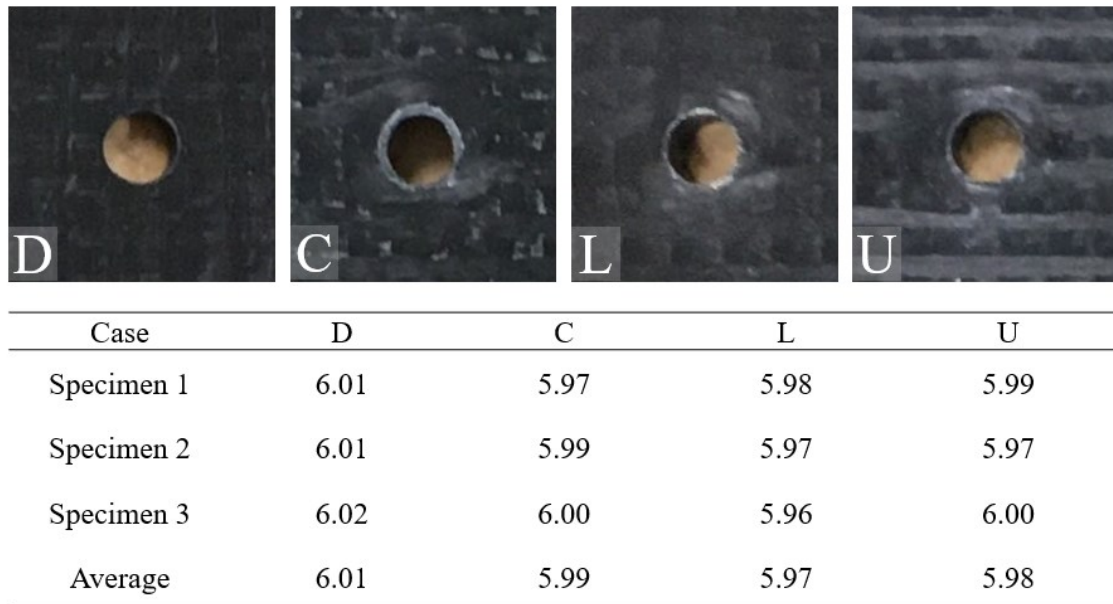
Diagram of representative bolt hole and summary of diameter measurements (mm).
